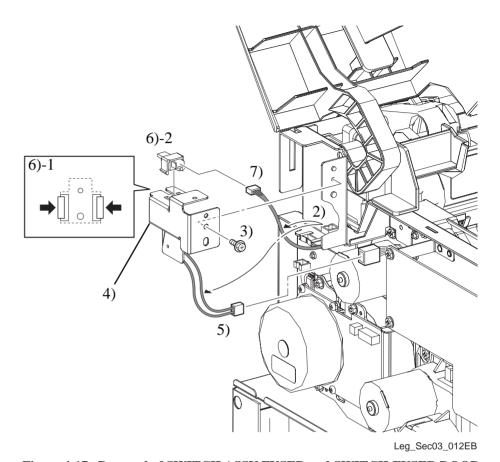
Removal of SWITCH ASSY FUSER and SWITCH-FUSER DOOR
